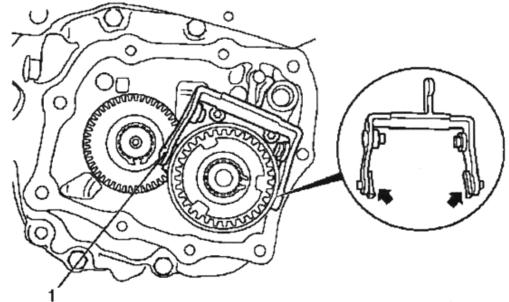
Setting shoe on fork inclusion fifth transfer:
